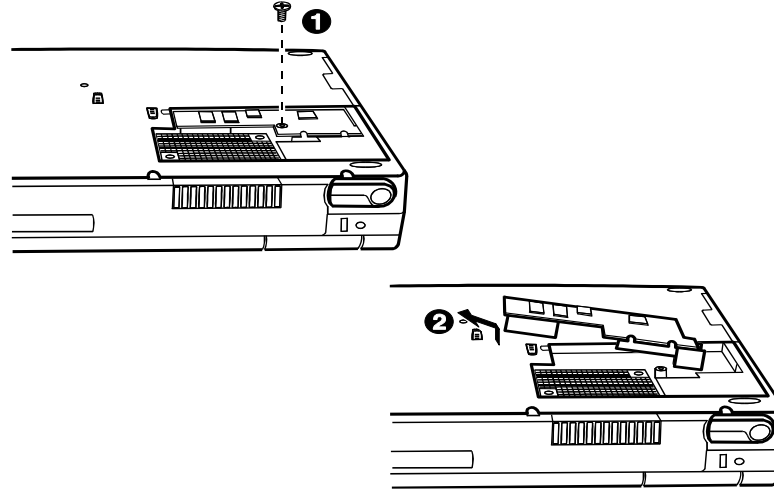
REMOVING THE FAX/MODEM/VOICE CARD
